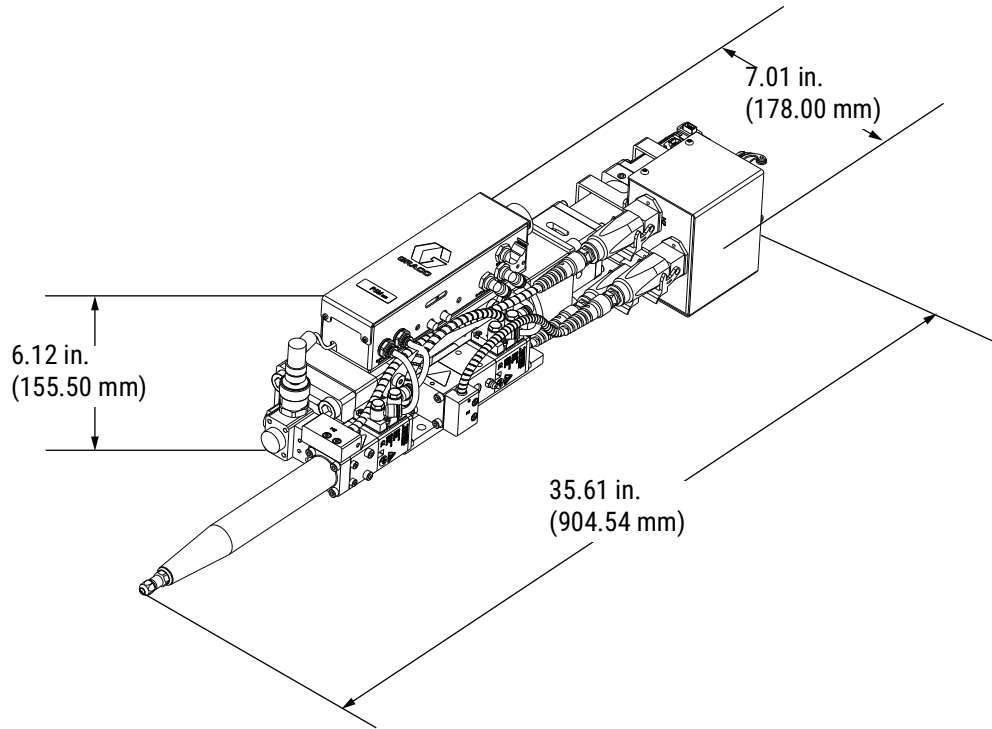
PSM Warm Melt Metering Unit Dimensions, 50cc
